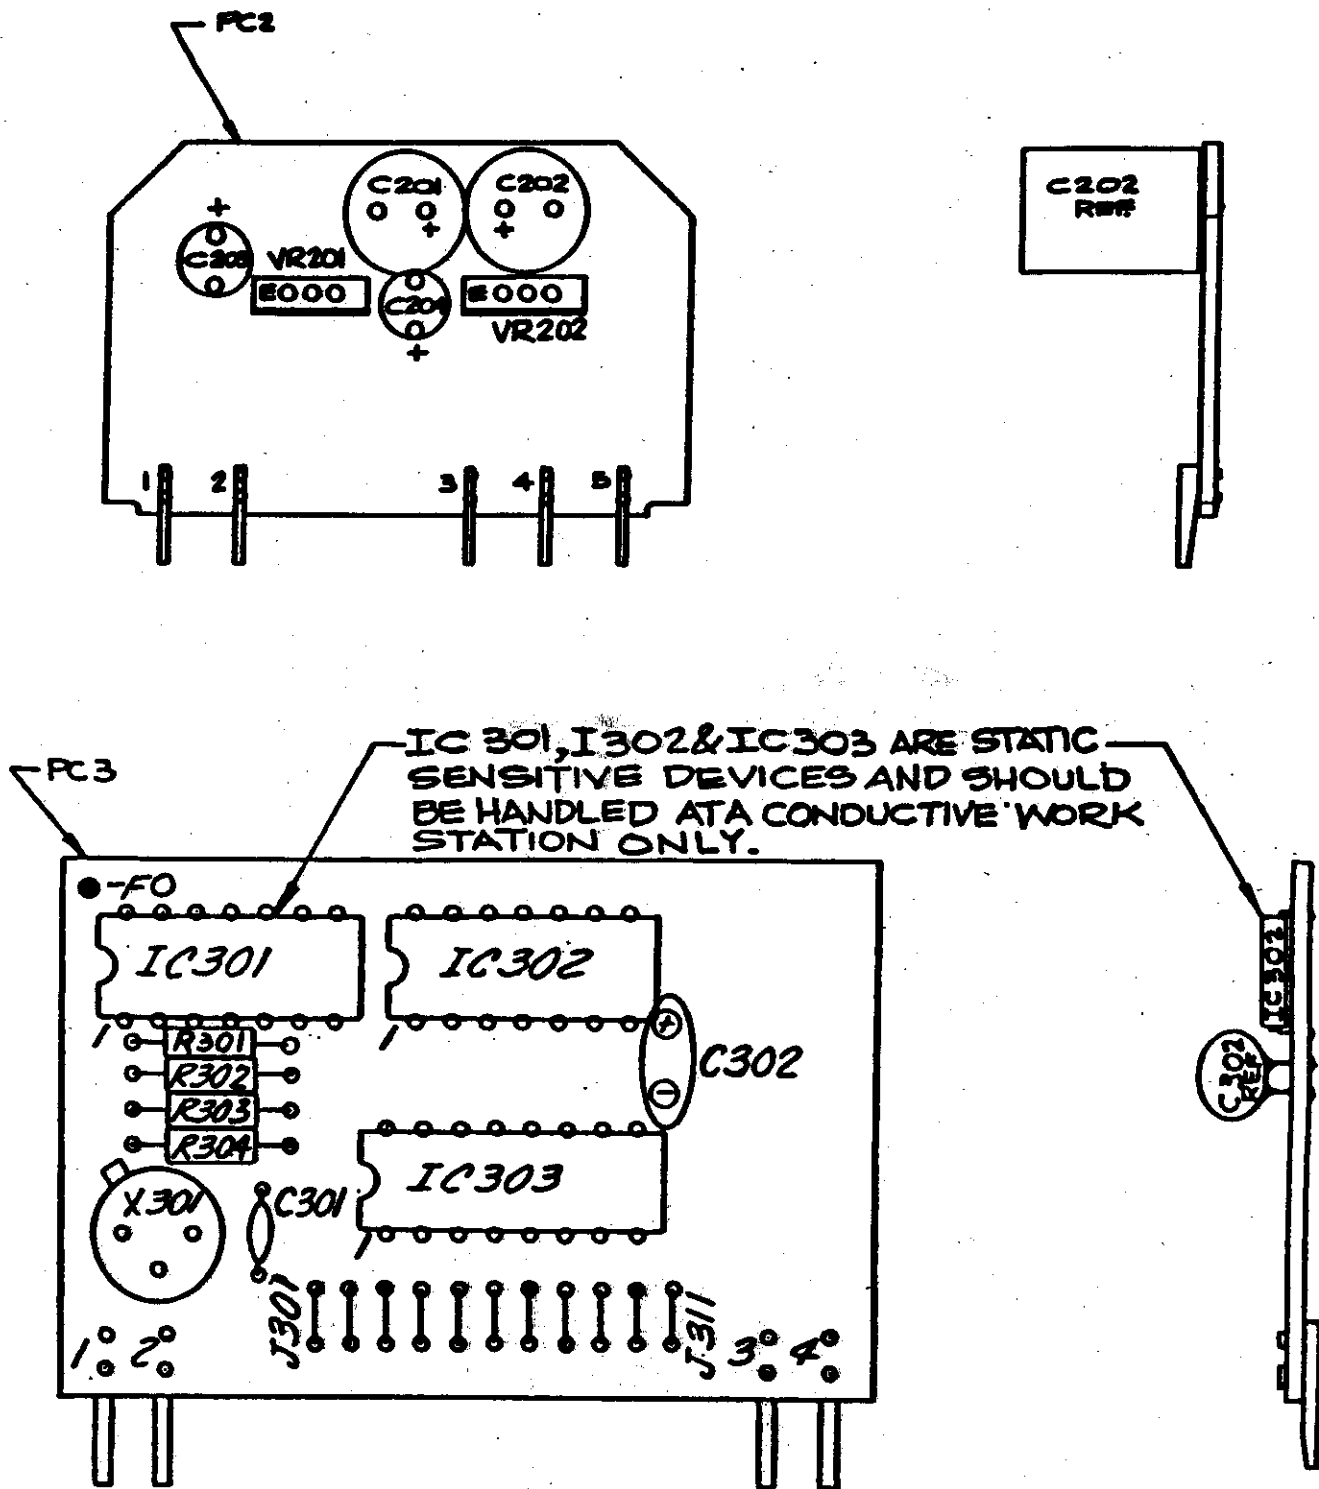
Printed Circuit Boards (PC2 & PC3) for Standard FDT Transmitter
